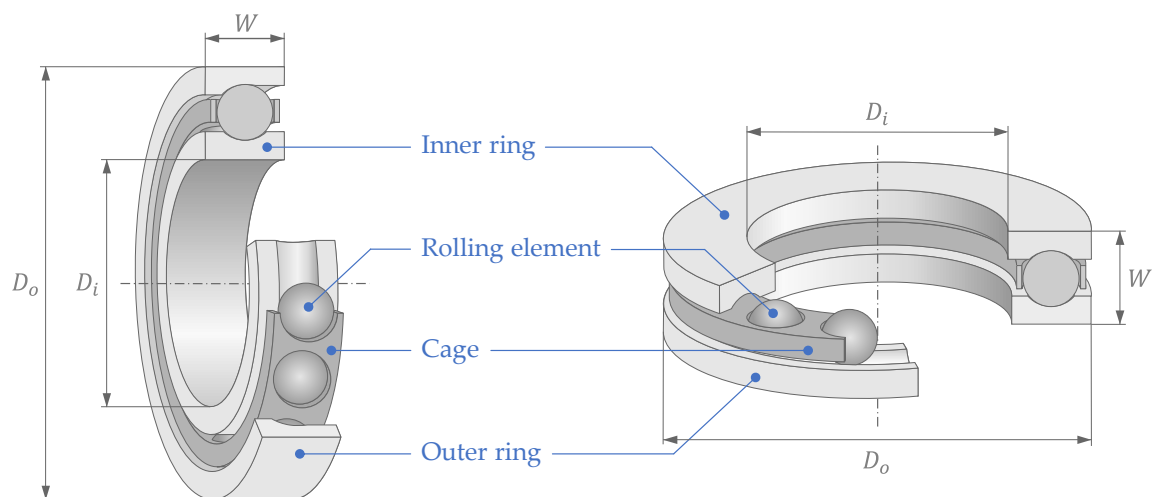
Main parts and mounting dimensions of rolling bearings through the example of an angular contact ball bearing and a thrust ball bearing
